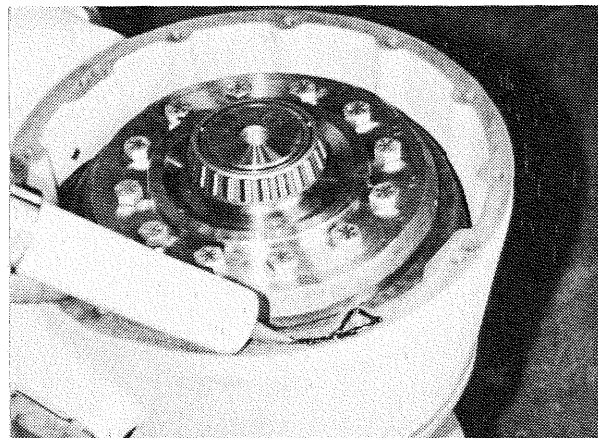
Drum Assembly & Installation (3 of 6)
